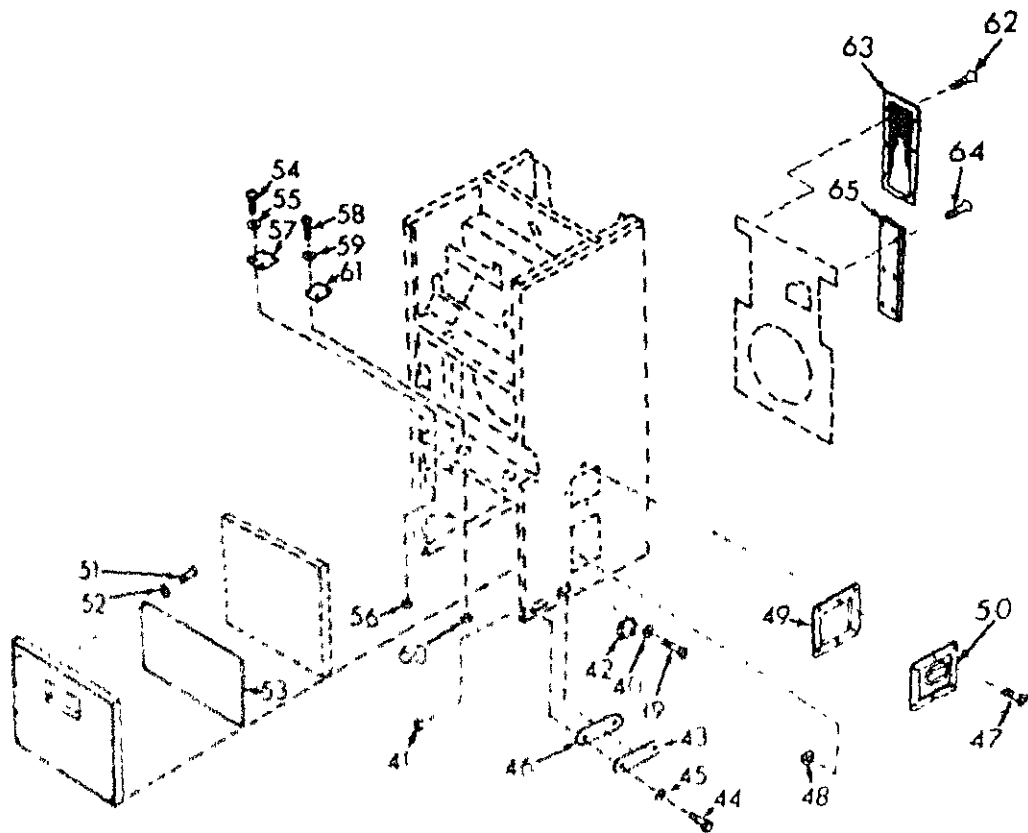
Lasing, Panels, Grilles, Filter and Drain Tubes
